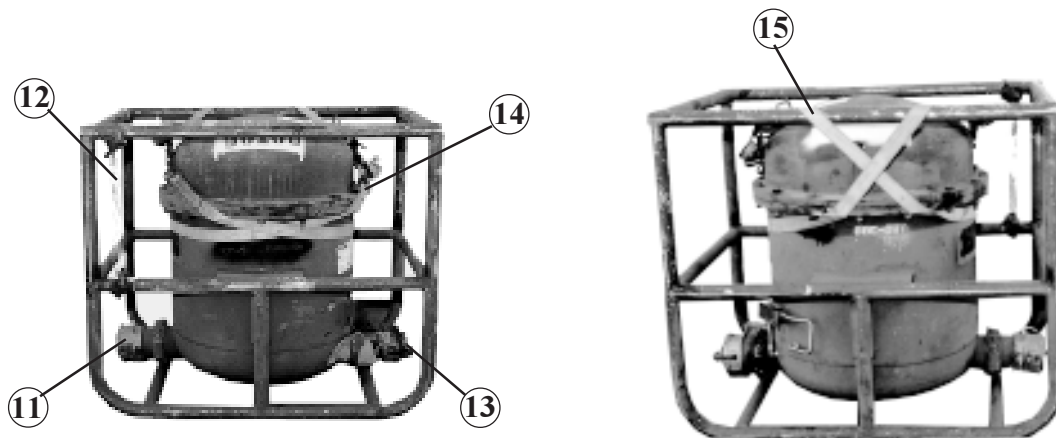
Pump assembly and filter/seperator prepared (continued)
